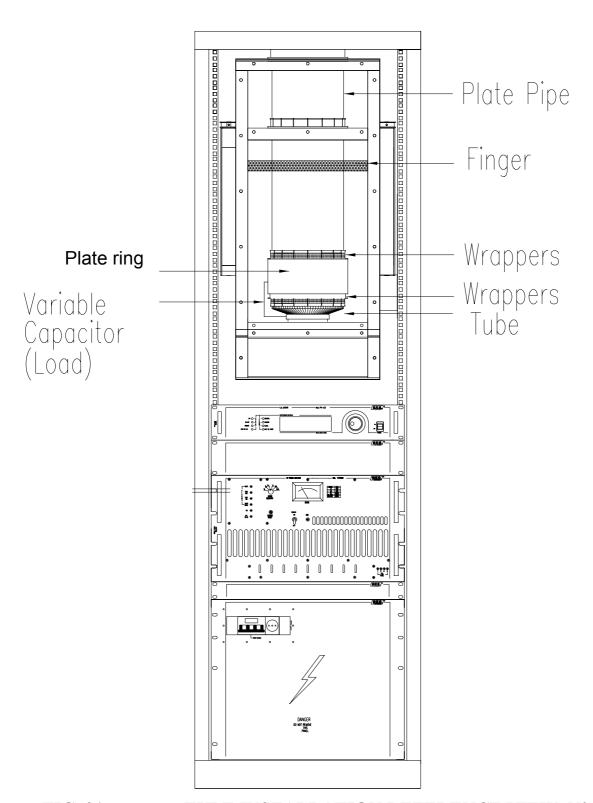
TUBE INSTALLATION REFERENCE VIEW N°4
